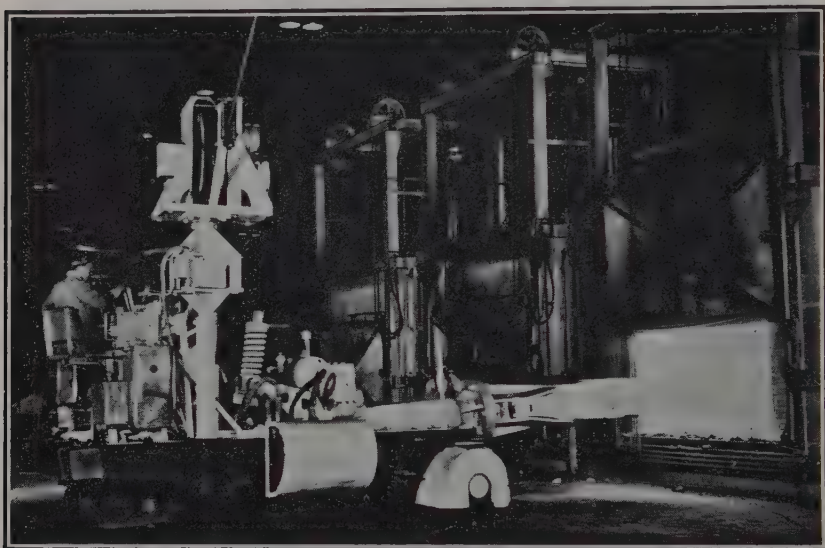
Furnace charger and manipulator. Courtesy of Salem-Brosius.
